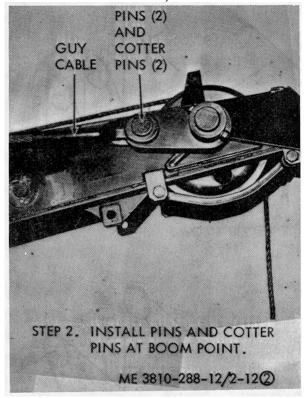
Guy cables, removal and installation (sheet 2 of 2).
